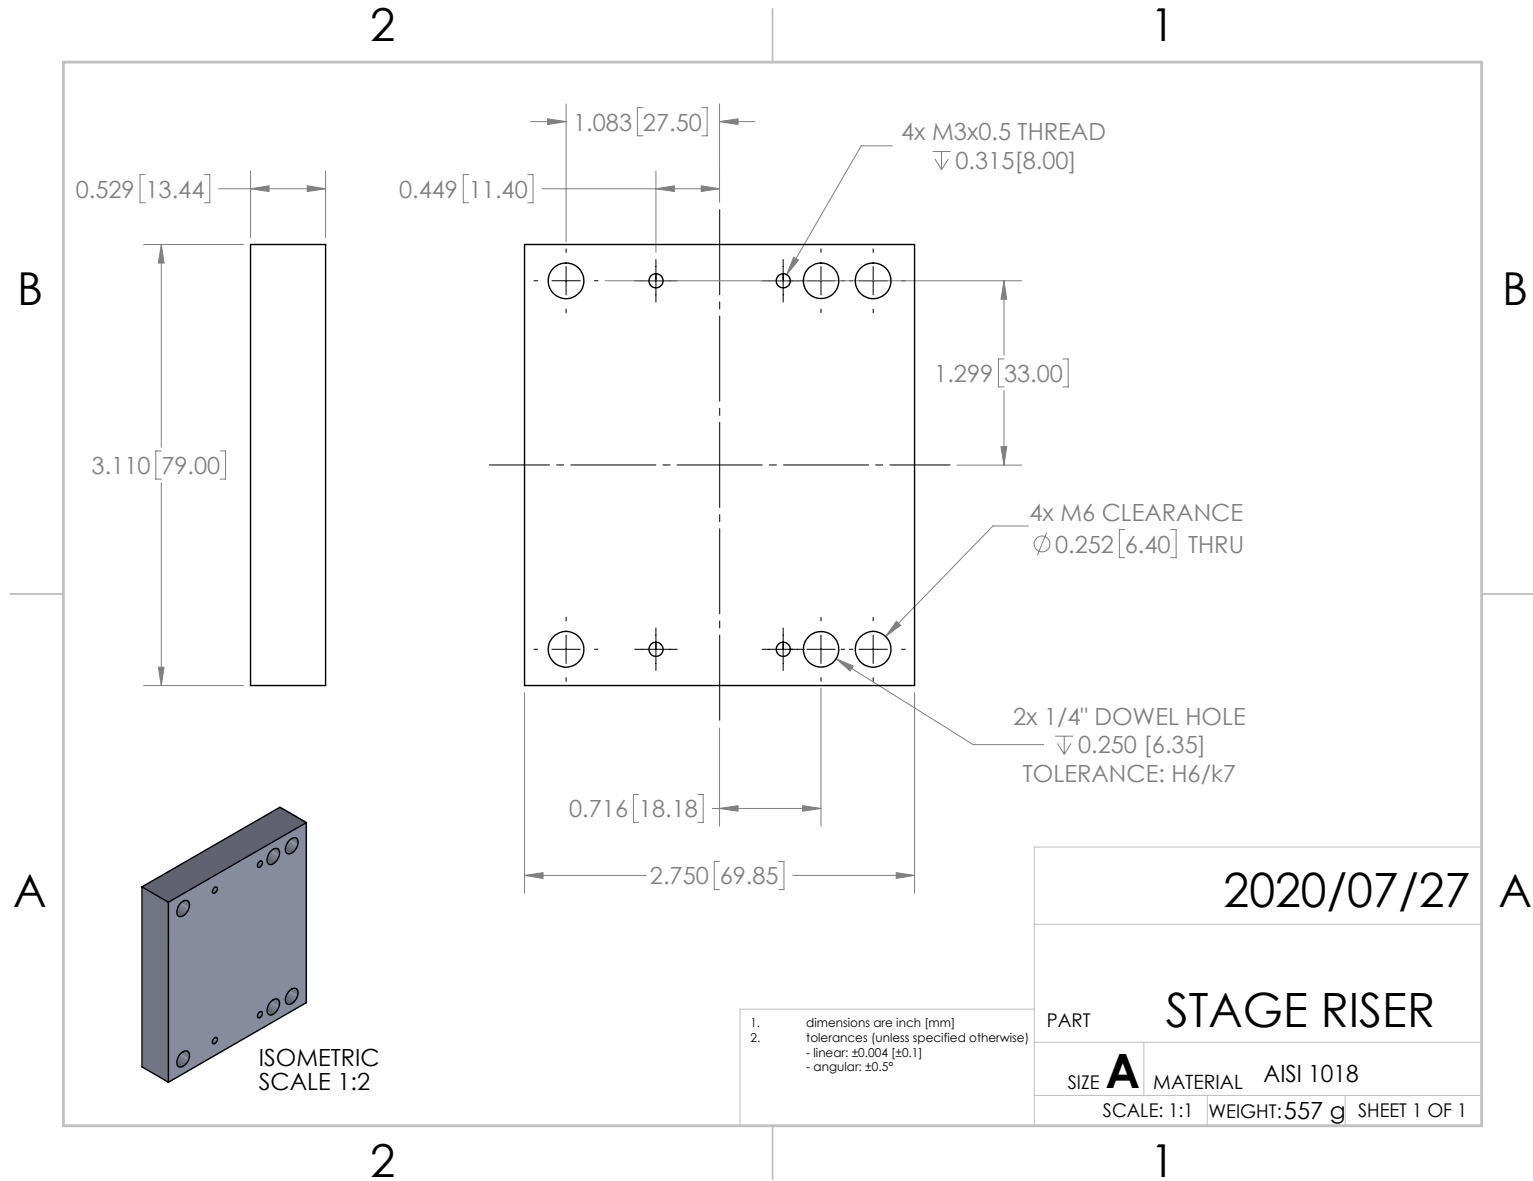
Mounting plate for fixing the piezo-actuator to the tester frame.
